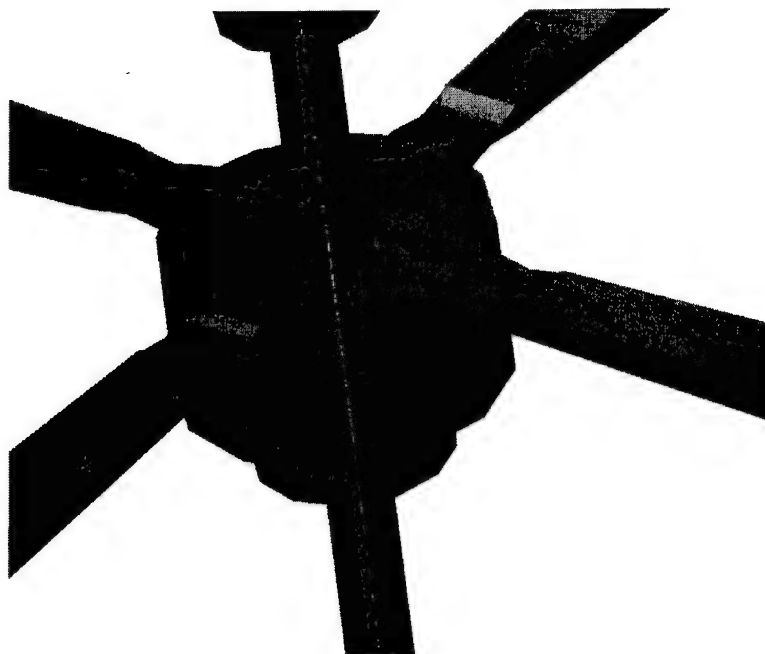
Detail View of Living Hinges Connecting Sliding Hub and Links
